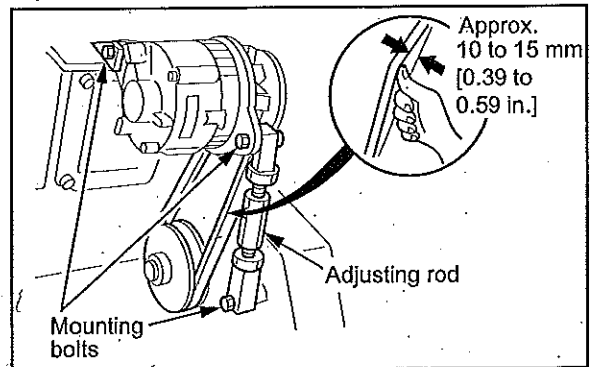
Belt and belt tension - Inspect and Adjust
